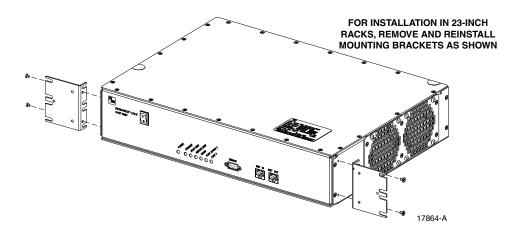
Installing the Mounting Brackets for 23-Inch Rack Installations
